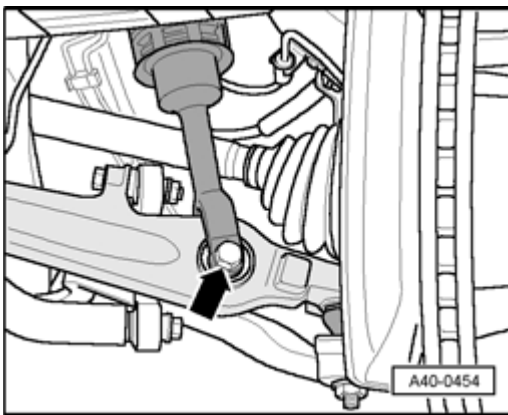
Removing Bolt And Suspension Strut From Control Arm
